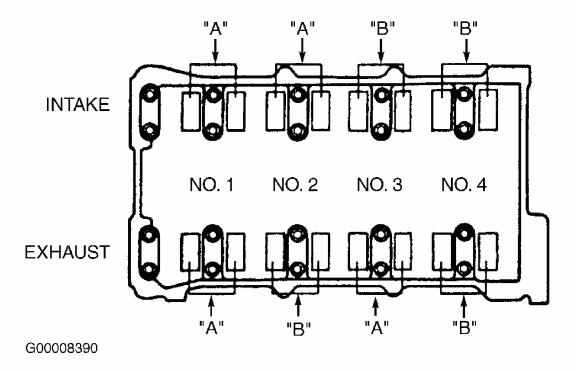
Valve Clearance Inspection Sequence Courtesy of MAZDA MOTOR CORP.
